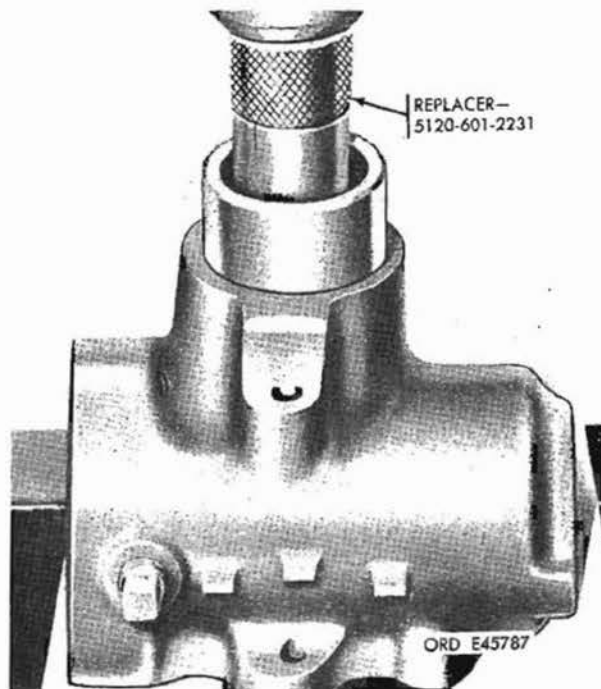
Installing outer lever shaft bushing using replacer - 5120-601-2231.
